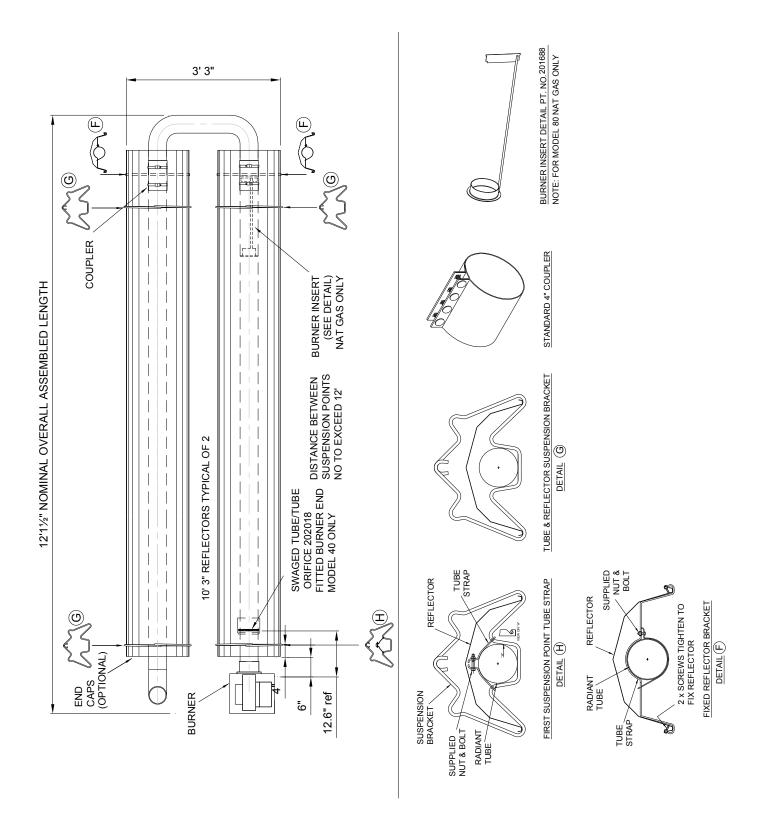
Heater Assembly: Model U tube 60-U40, 80-U40, 100-U40, 125-U40 and 150-U40.
